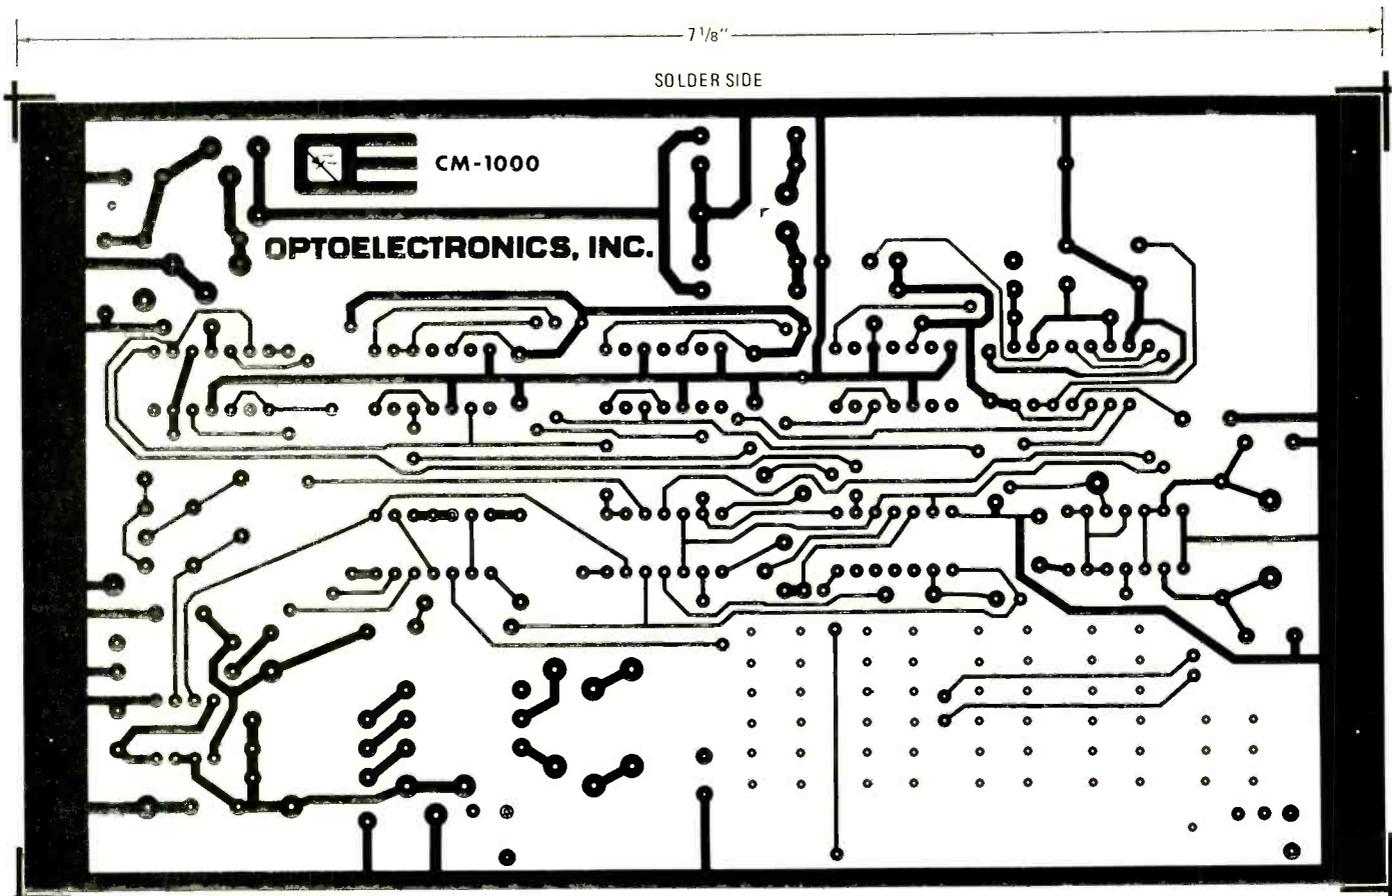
FOIL PATTERN for the bottom (solder) side of the main board.
